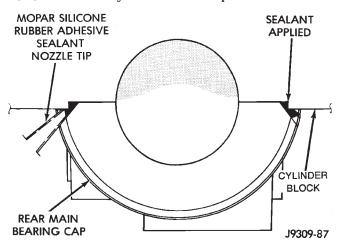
Apply Sealant to Bearing Cap to Block Joint OIL PUMP
